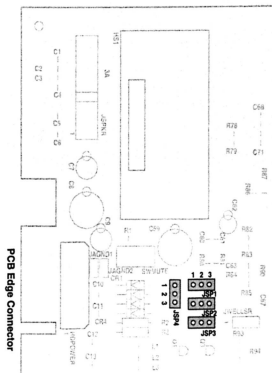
Detailed View of Game PCB Audio Jumpers
